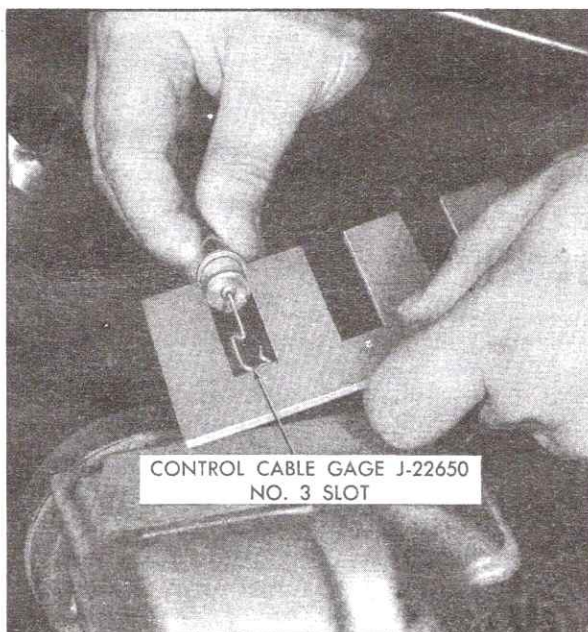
Control Cable Check (All Except 693 Styles)
